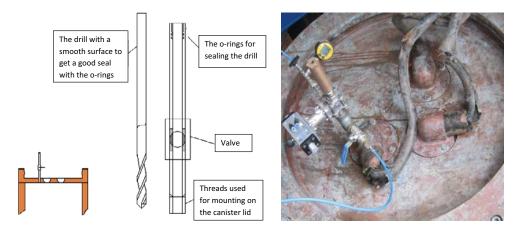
A schematic drawing and a photo of a "hot tap" device.
